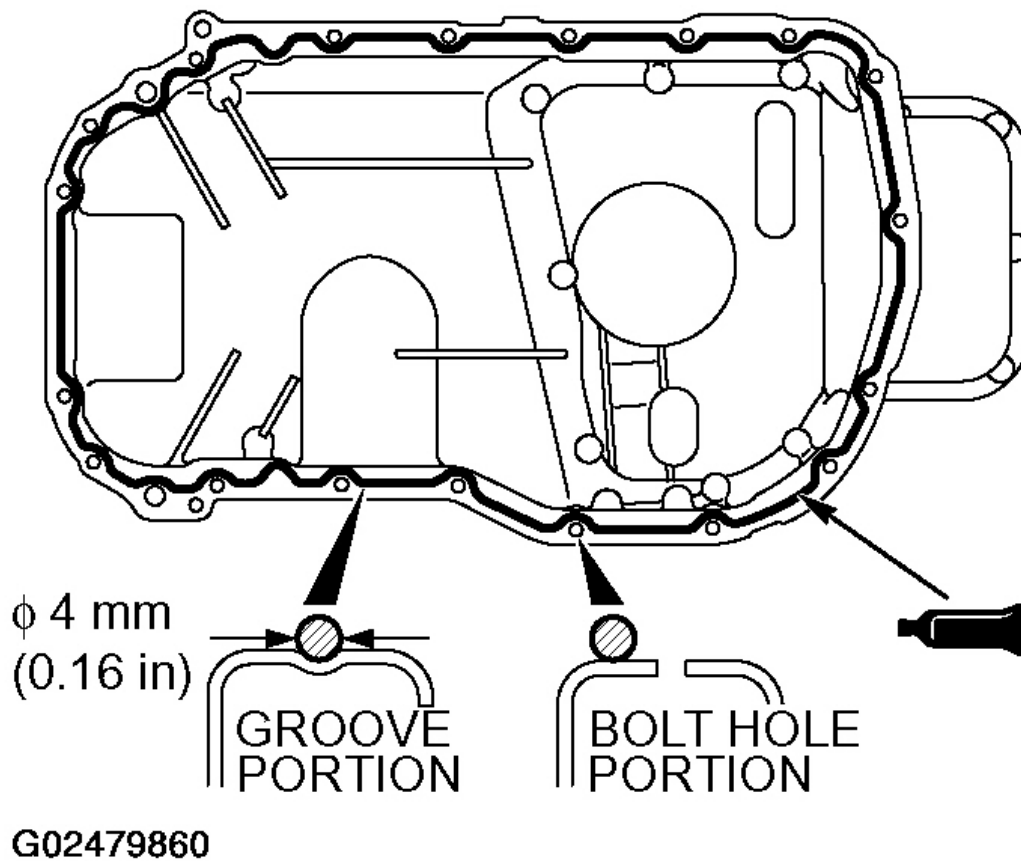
Applying Bead Of Sealant To Mating Surface Of Engine Upper Oil Pan
